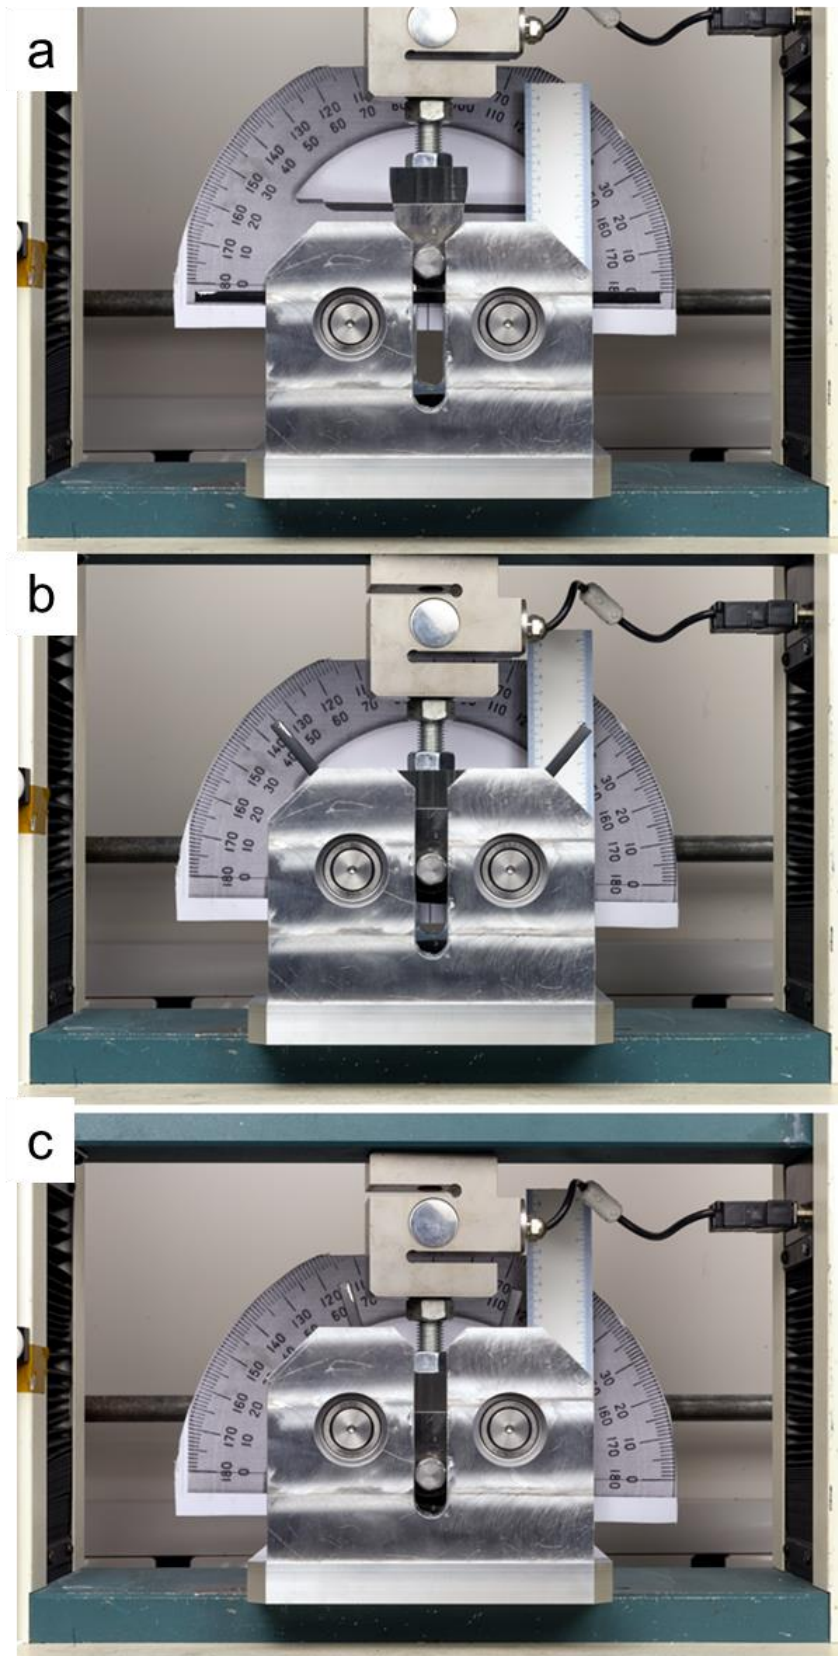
Image sequence of guided side bend test being performed where: the specimen is ready for testing (a), the specimen is at a bend angle of 90° (b), and the specimen is at a maximum allowable bend angle of 45° (c)
